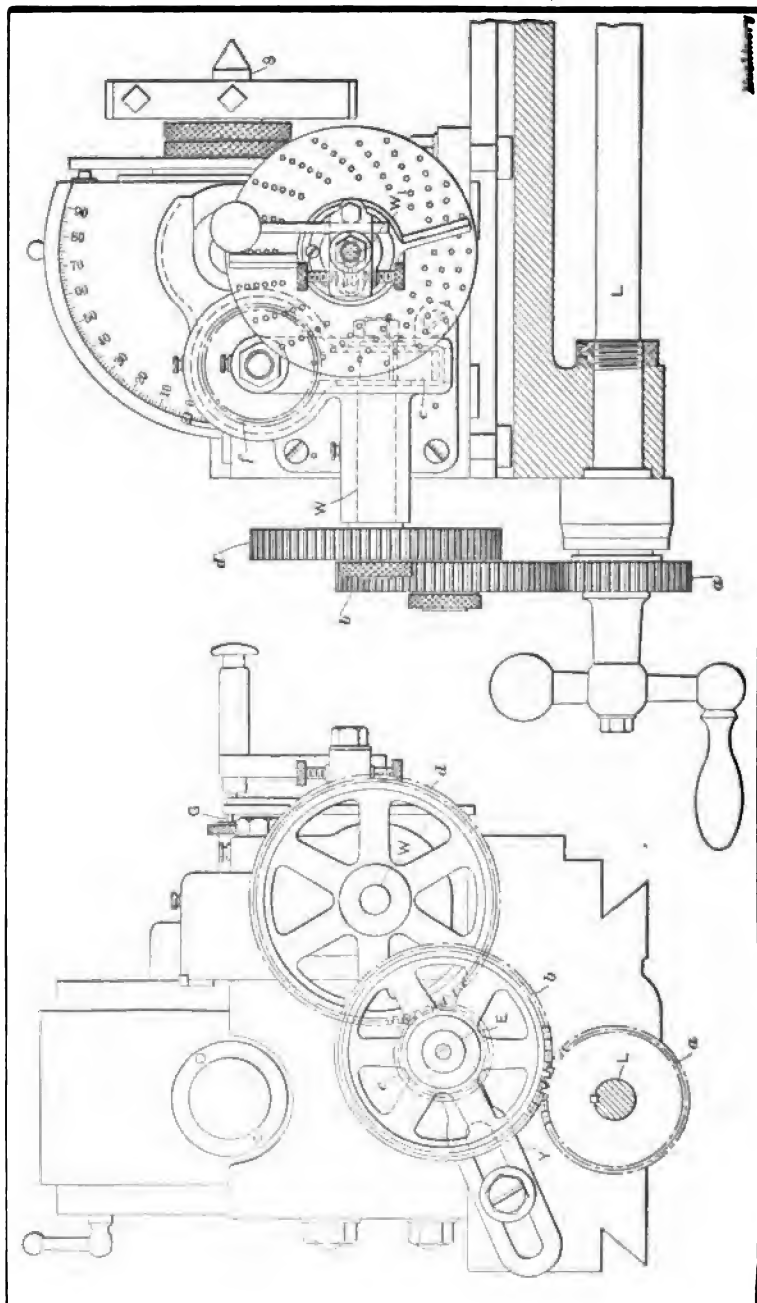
The Indexing or Spiral Head of a Universal Milling Machine
